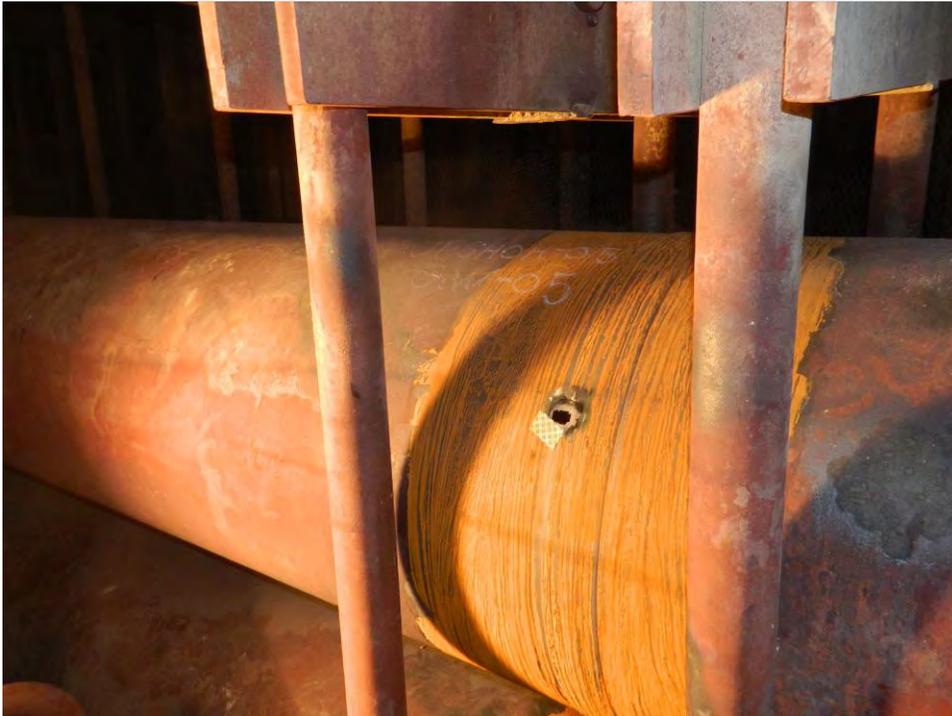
Photographs of girth weld Nos. GW-4 and GW-5 on the Upper Finishing Superheater Outlet header.
